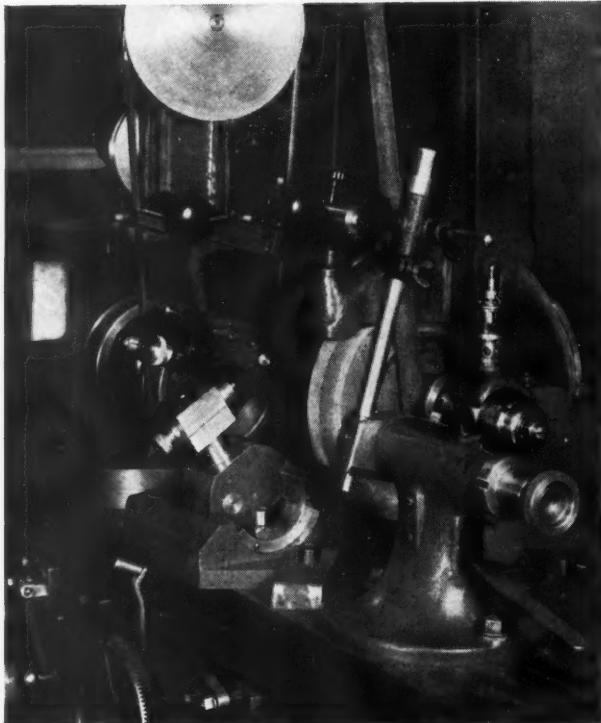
Equipment used in making tests on industrial diamonds, consisting of a Brown & Sharpe No. 2 grinder upon which was mounted a special diamond dressing tool holder.
